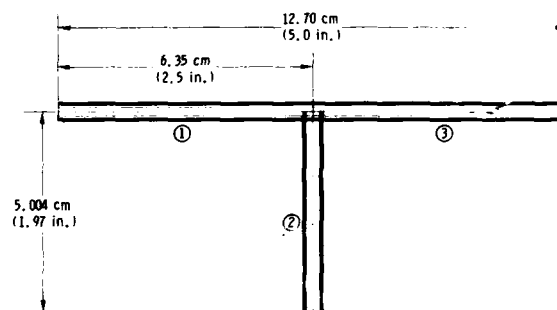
Repeating element for example 2, heavily loaded, composite blade-stiffened panel.
